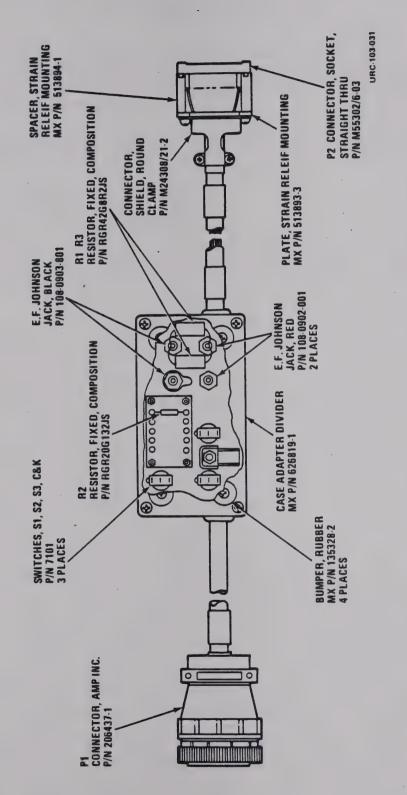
Exploded View, Cable Adapter, Divider/Audio
